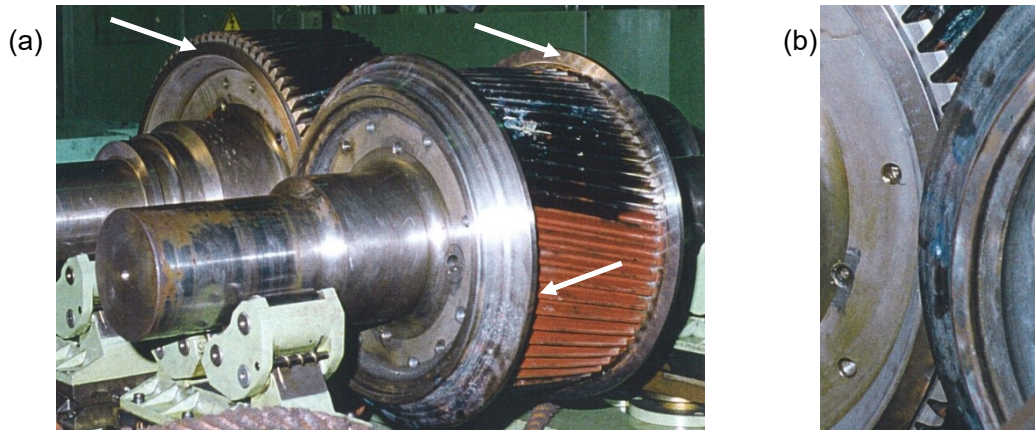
(a) Thrust cone bearings (arrowed) used in a low ratio single helical gear pair transmitting 6MW and (b) close-up of tooth meshing area showing the overlapping cones.
